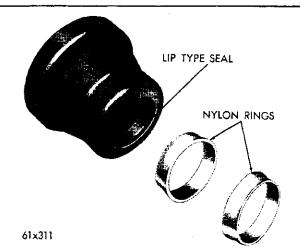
Nylon Rings and Lip Type Seal (Disassembled View)
